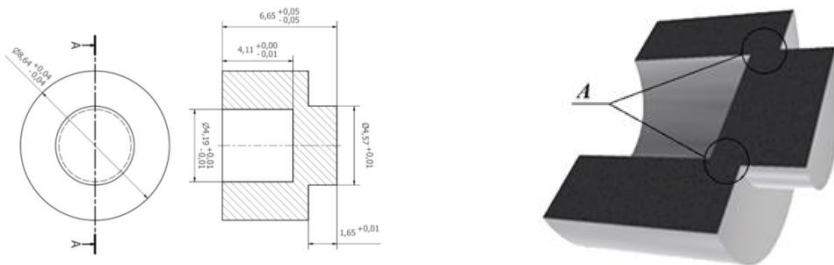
Sample dimensions for adiabatic testing of shear bands - a; axonometric section of the sample after the impact test with the place marked with the letter A, where shear bands were expected to occur - b
